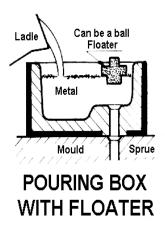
Design rules of pouring boxes for castings up to 100 to 200 kg
